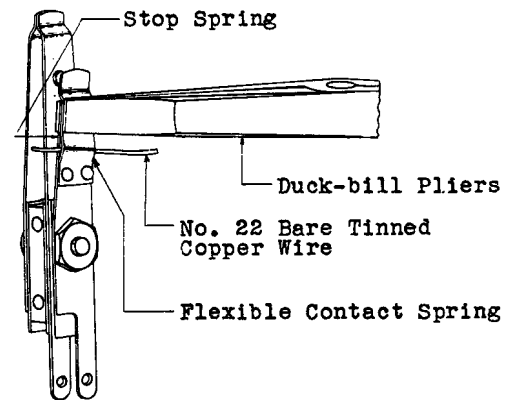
Method of Adjusting for Flexible Contact Spring Position
